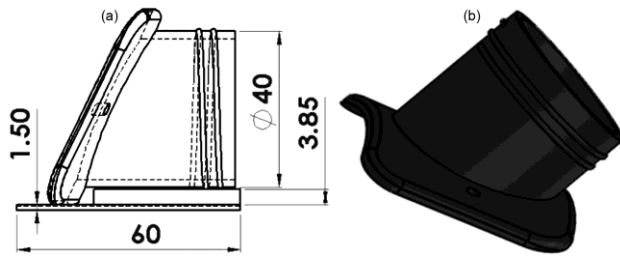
CAD of hopper for seed chamber (a) side view, and (b) isometric view of seed hopper
